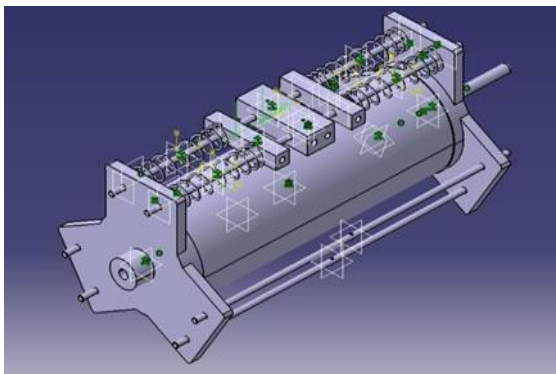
Model Design of Pipe Cleaning and Inspection Robot
